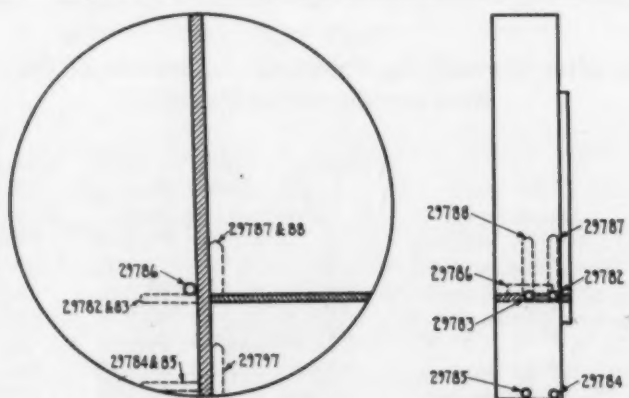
Disk Forging (As Forged), Showing Location of Core Drill Test Bars.
